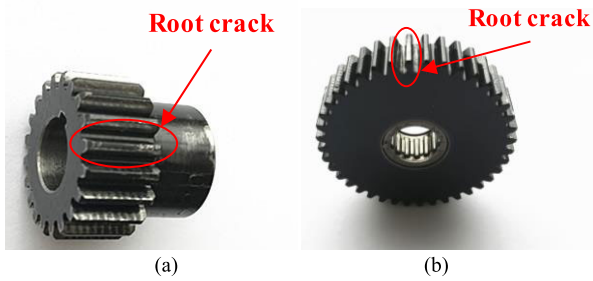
Gear fault states: (a) sun gear, (b) planetary gear.
